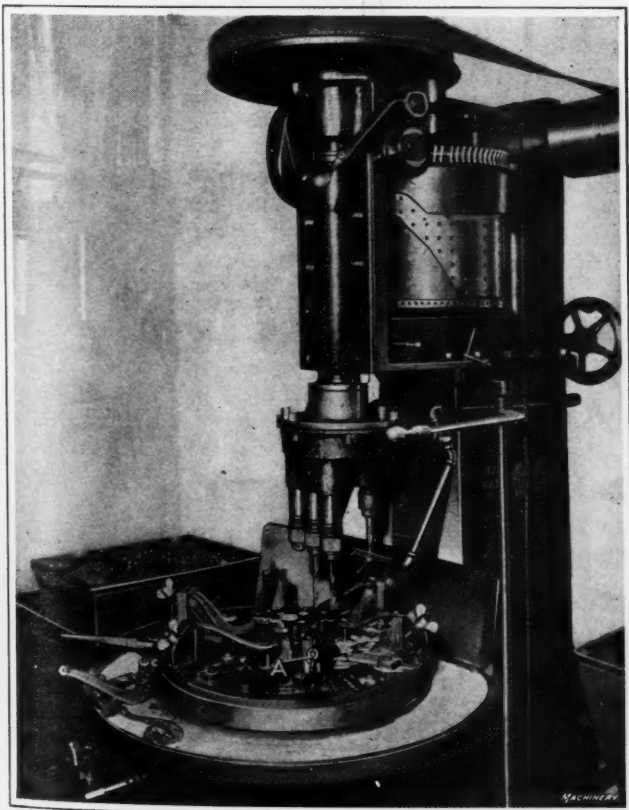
Baker Semi-automatic Drilling Machine. Both this and Machine shown in Fig. 50 are in Operation in Willys-Overland Plant
